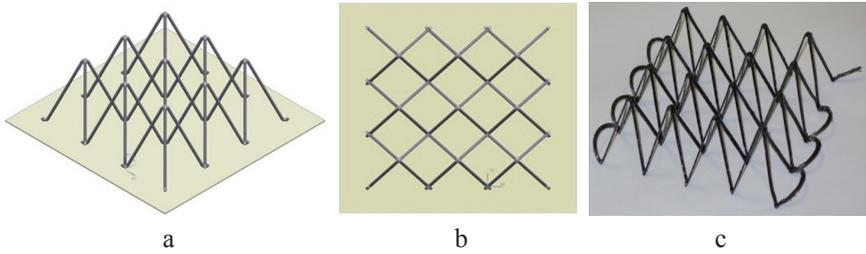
Pyramidal truss structure based on linear corrugation: a – truss structure based on linear corrugation, b – net, c – truss structure sample
